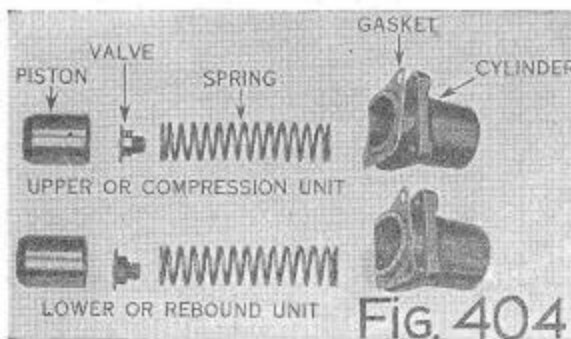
Order of assembly of the shock absorber component parts. See text for function of hole in each piston.
